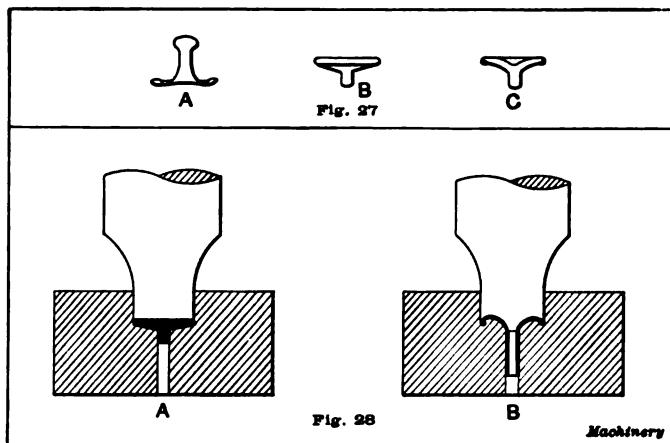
A, Collar Button; B, Fastener; C, Improved Fastener. Fig. 28. A, Die for Fastener, with Work in Place; B, Die intended to produce a Fastener of Improved Design, showing Piece actually produced.
